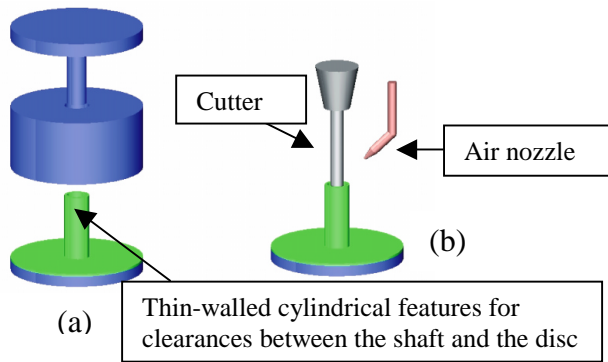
(a) Support structures with moving parts. (b) Mechanical loads from the cutter and air during CNC machining.
